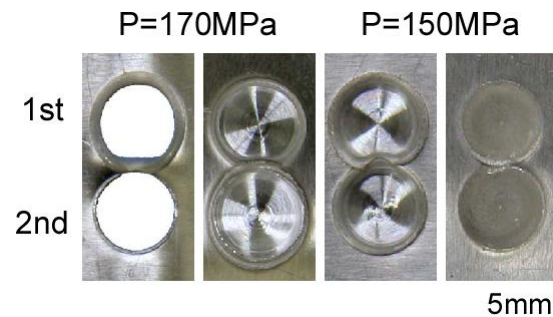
Appearances of cross tensile tested specimen.(L=6mm)
